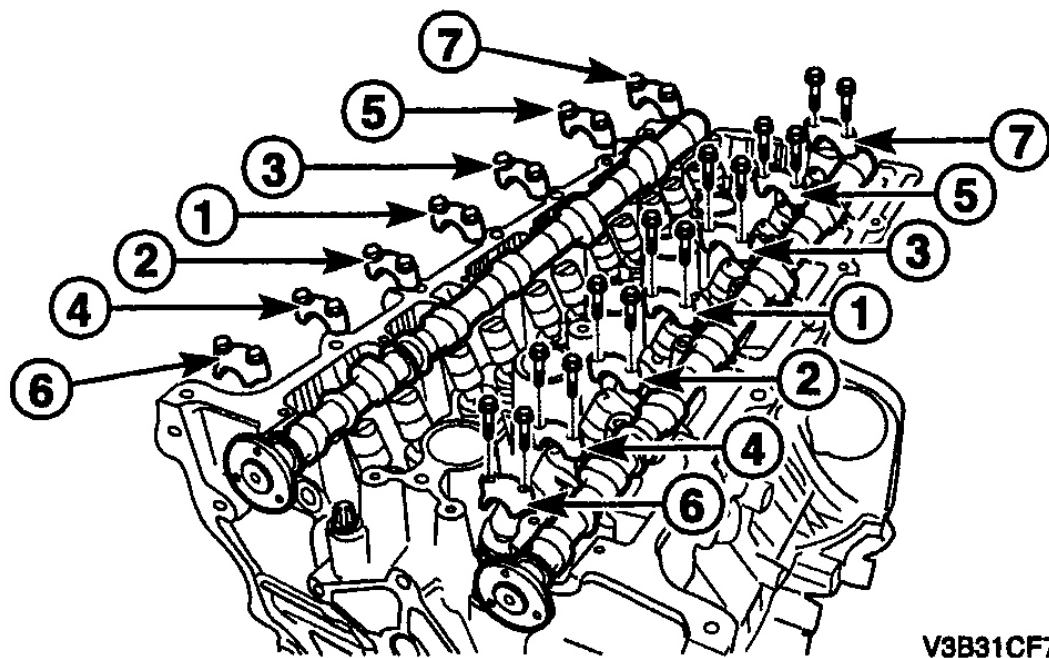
Identifying Camshaft Cap Bolts Removing Sequence
